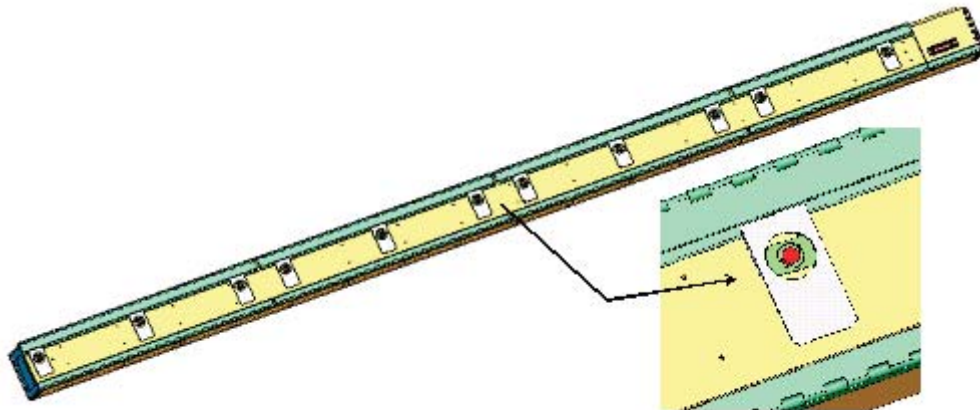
Clamshell Closure Latches and Keeper Bolts
